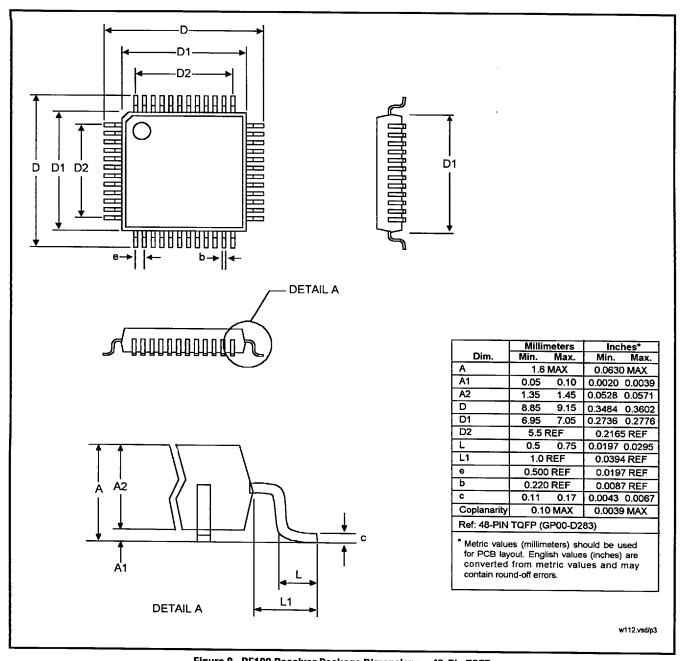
RF100 Receiver Package Dimensions – 48-Pin TQFP
